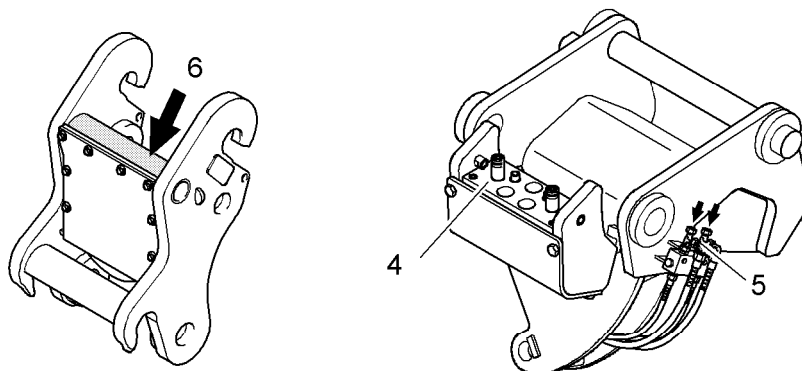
LIKUFIX work tool on quick-change adapter without LIKUFIX
